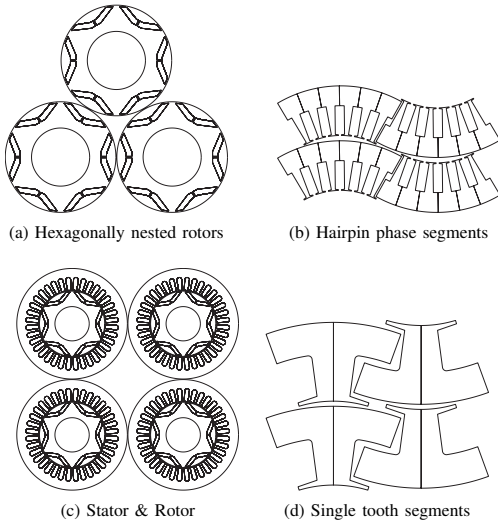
Nesting of the stamped components, the material yield is: Single tooth stator 77.66 %, Distributed phase segments, incl hairpin 60.03%, Distributed Full stator & rotor incl hairpin 49.15% FSCW Full stator & rotor 49.40%, Rotor 44.59 %
